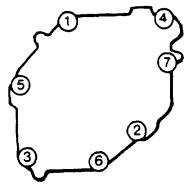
Gear End Cover Capscrew Tightening Sequence
